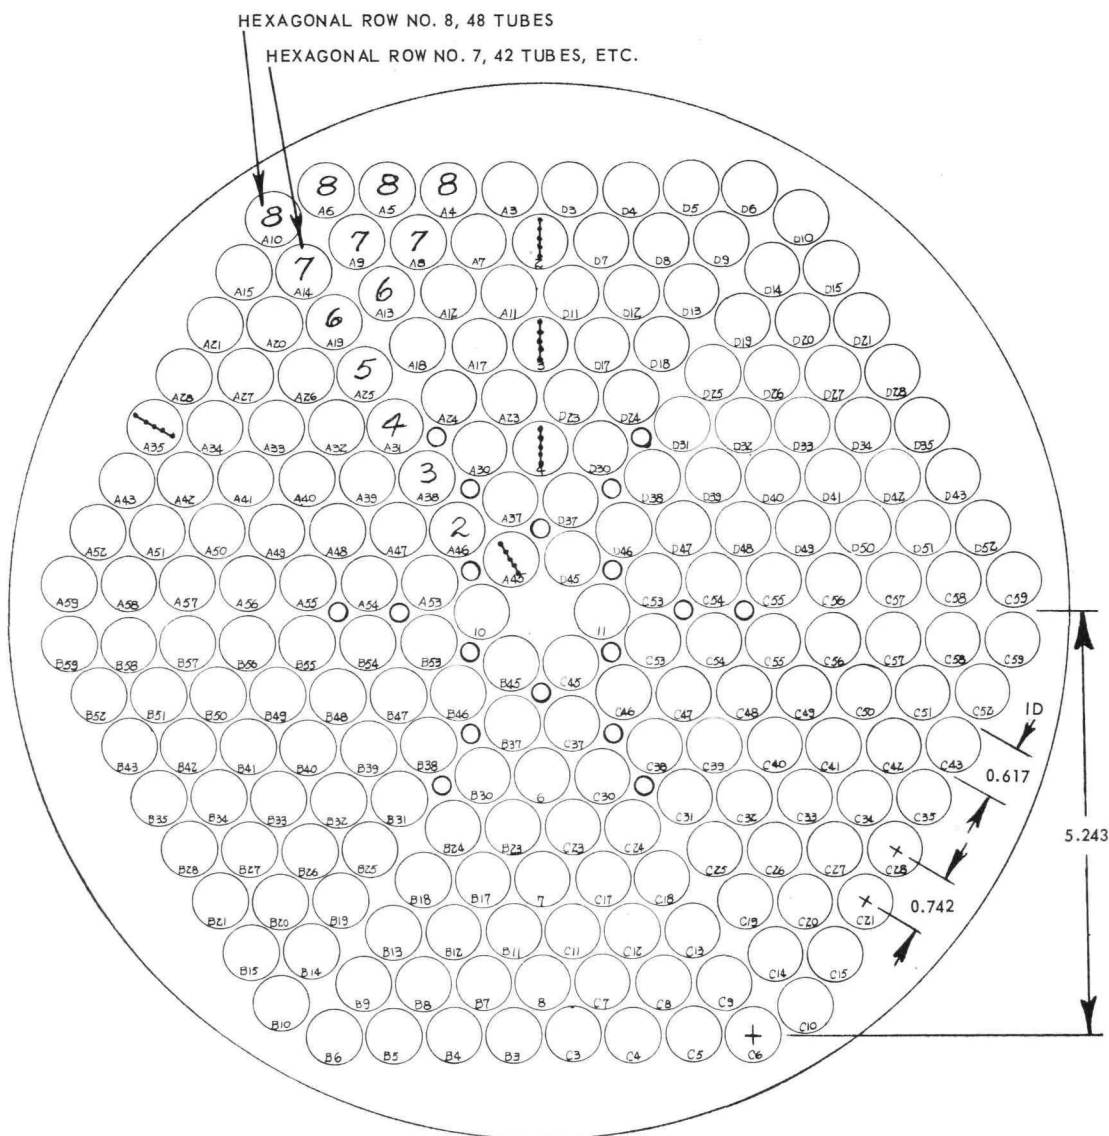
Sketch of front face of 216 tube core simulator as used in tests
